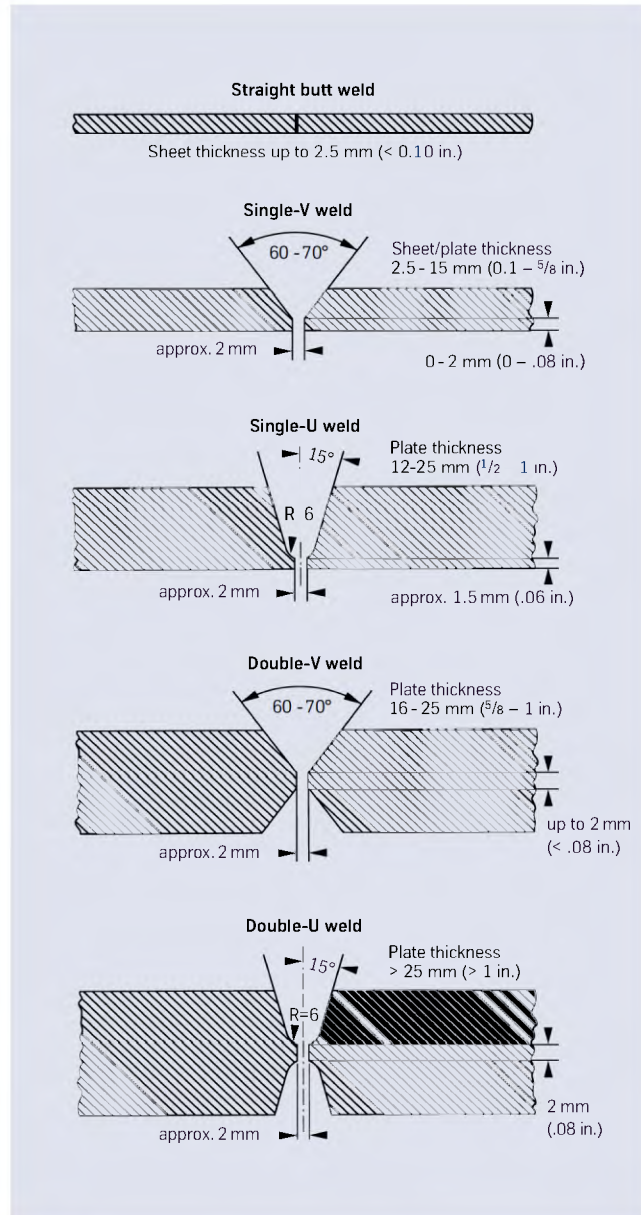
Edge preparation for welding of nickel-base alloys and special stainless steels.
